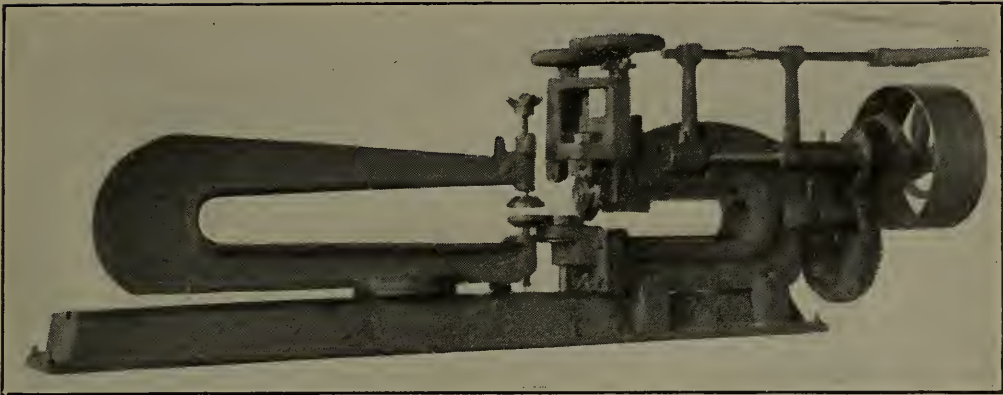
SHEET METAL FLANGER AND DISC CUTTER.
